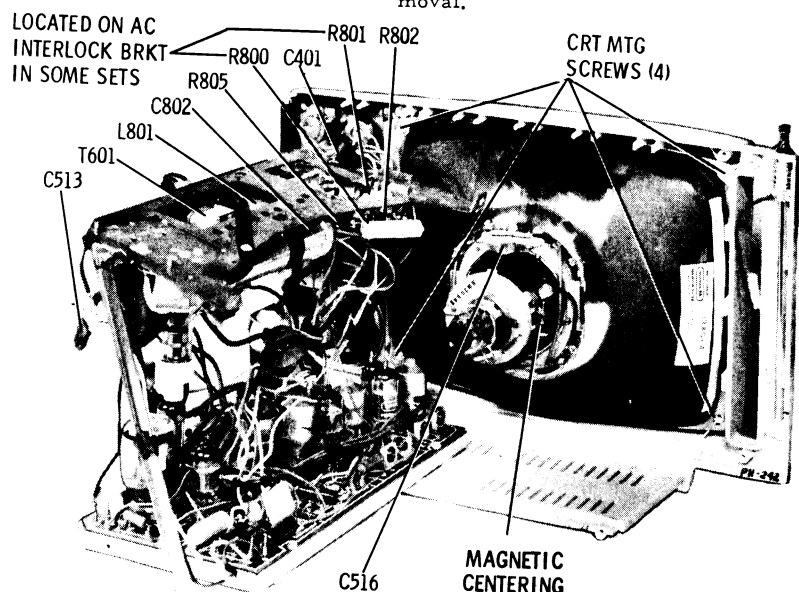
CHASSIS POSITIONED FOR CRT REMOVAL
